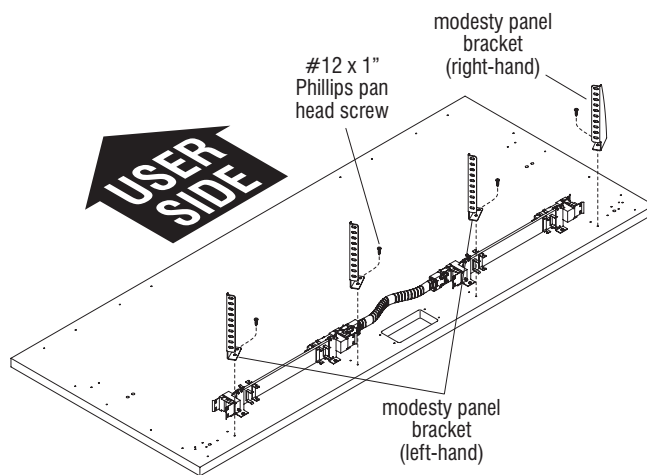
Single-Sided Fixed Benching with 10-Wire Electrical & Modesty Panels
